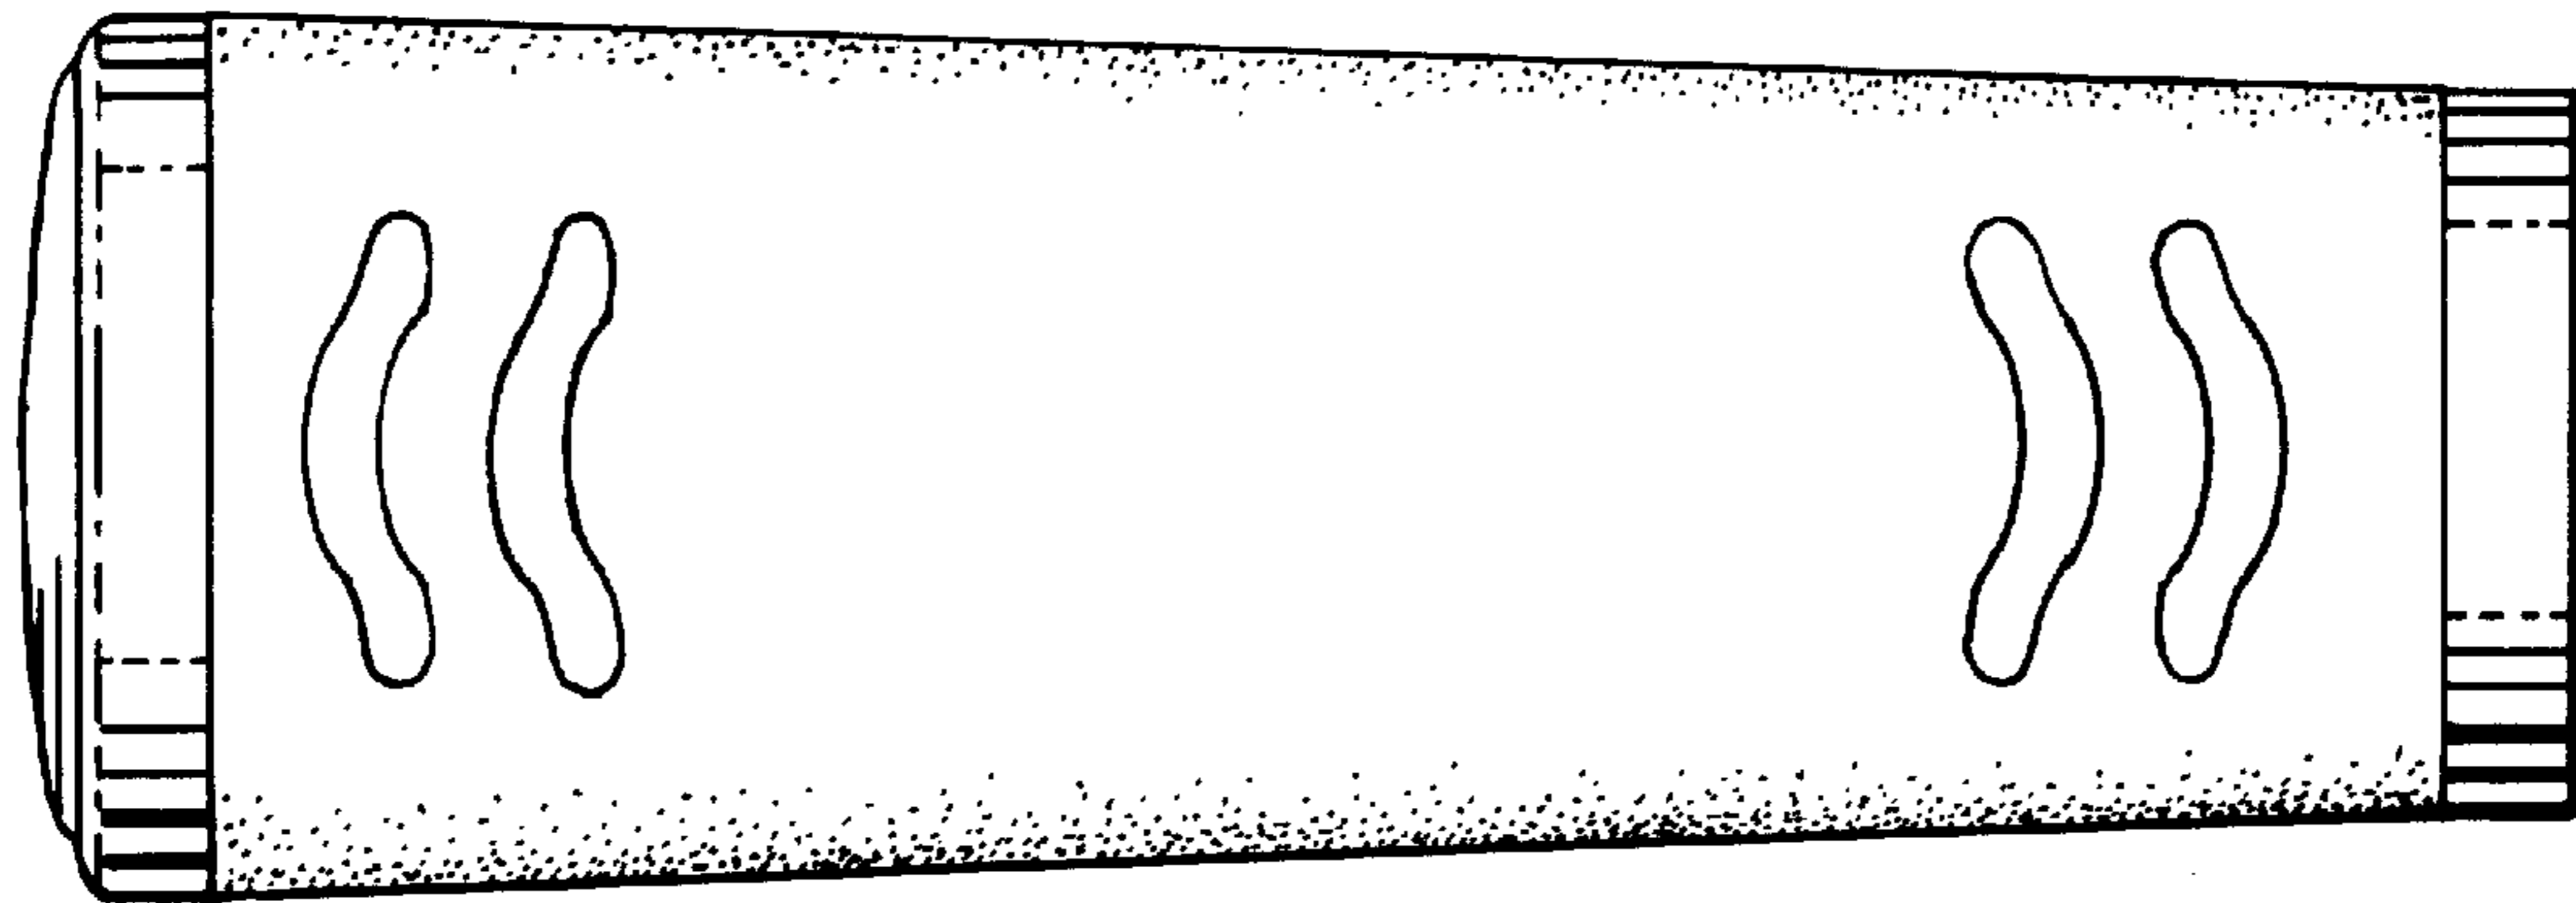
is a front elevational view of the tool handle; and, FIG. 5 is a rear elevational view of the tool handle.
